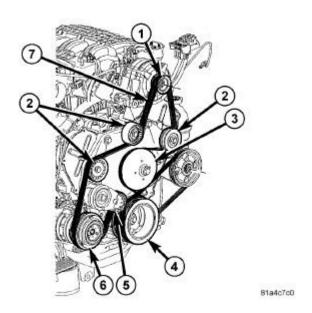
Accessory Drive Belt Routing - 4.0L Courtesy of CHRYSLER LLC
